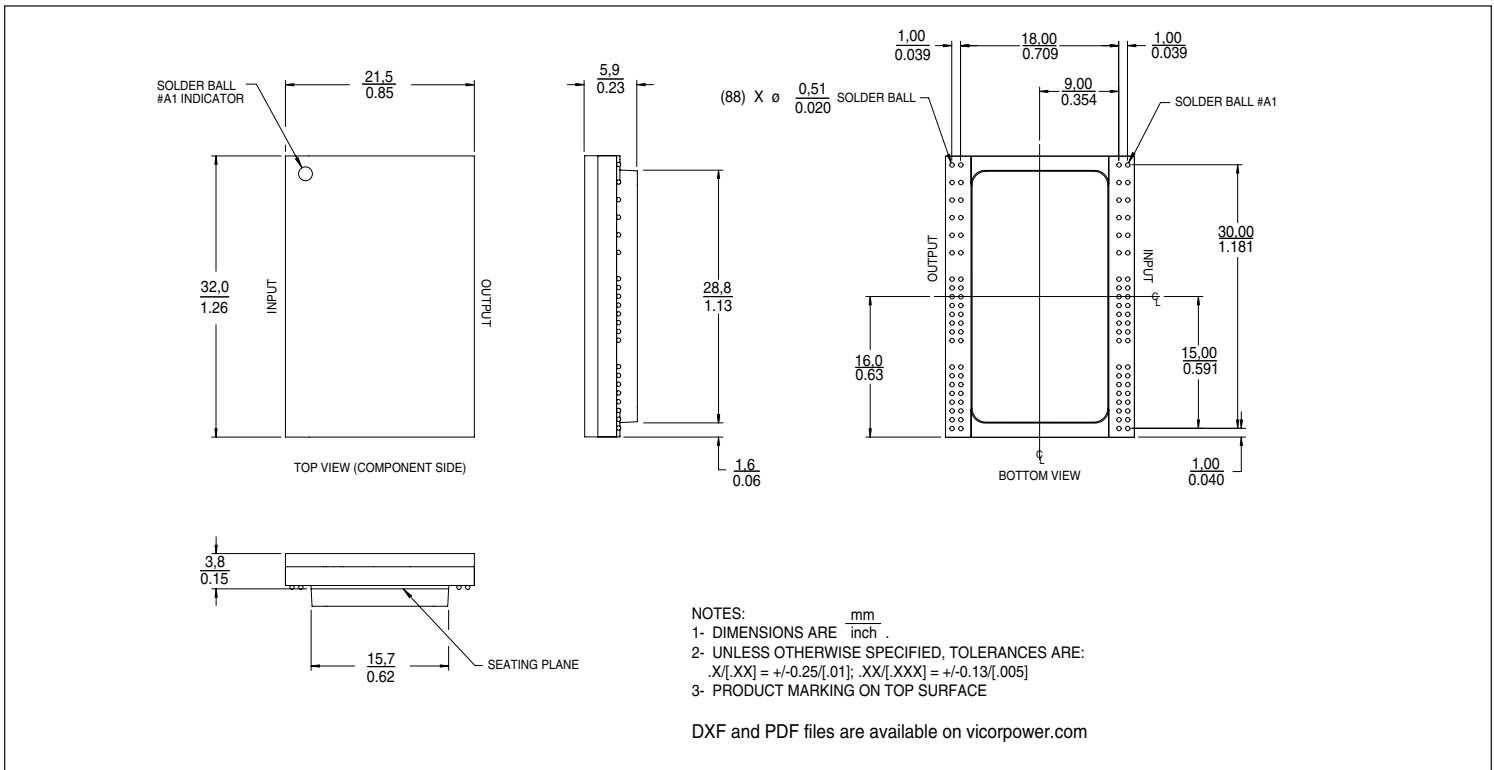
PRM BGA mechanical outline; Inboard mounting
